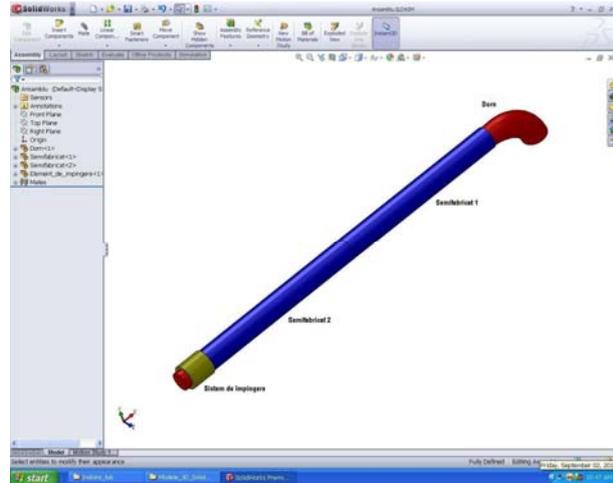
Ensemble of mandrel – blank product: 1- blank product; 2- pushing system.
